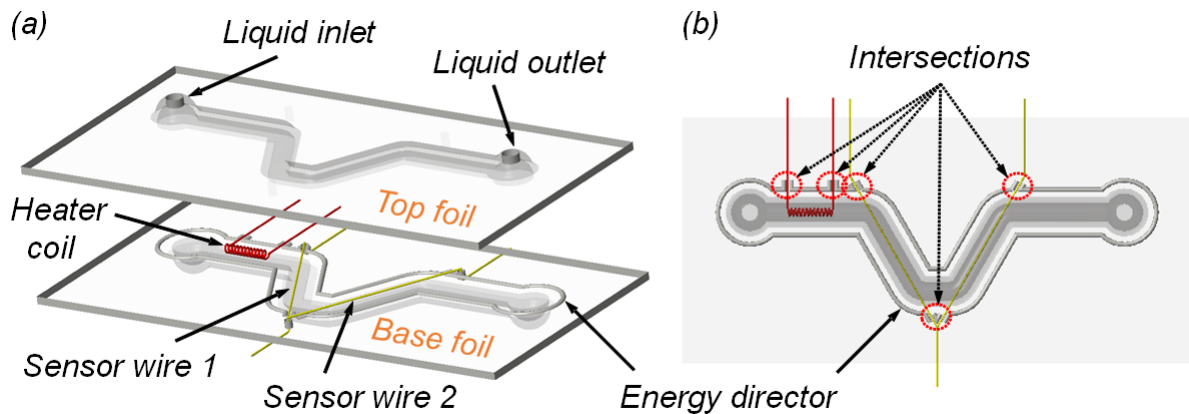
Explosive view (a) and top view (b) of the flow rate sensor.
